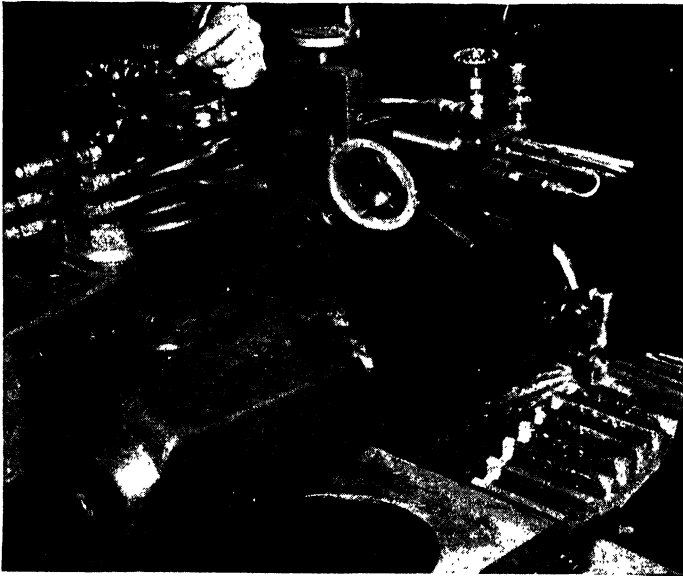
Flame hardening of a cast-steel gear. (Courtesy of Linde Air Products Co.)
